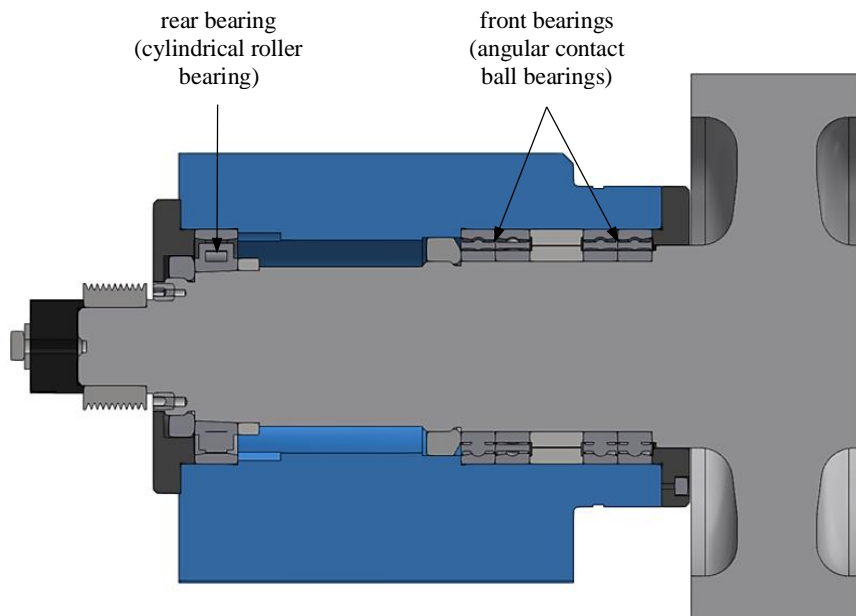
Arrangement of bearing elements within the bearing housing.
